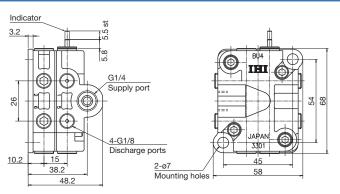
Cross-sectional view of the distributor (BU-8R)
